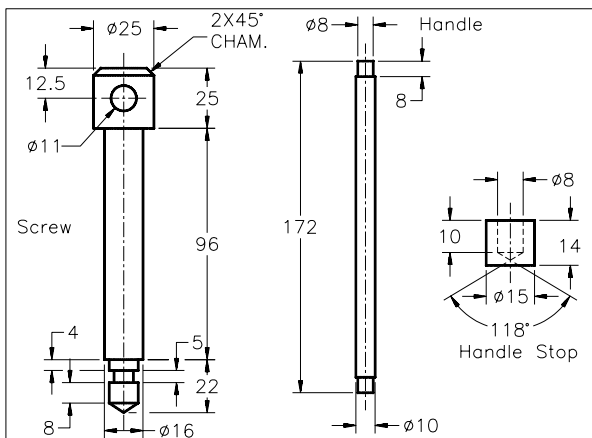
Dimensions of the Screw, Handle, and the Handle Stop
